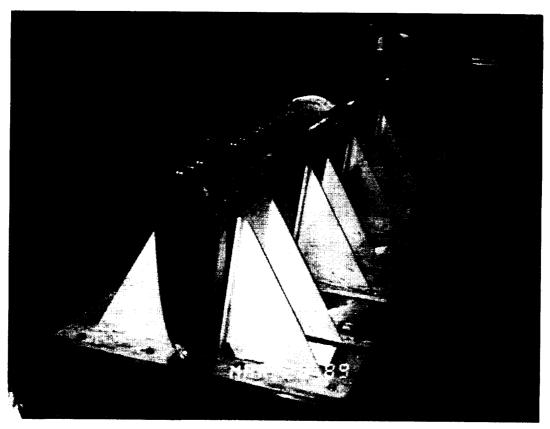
Form Die and Skin Assembled Into Retort
